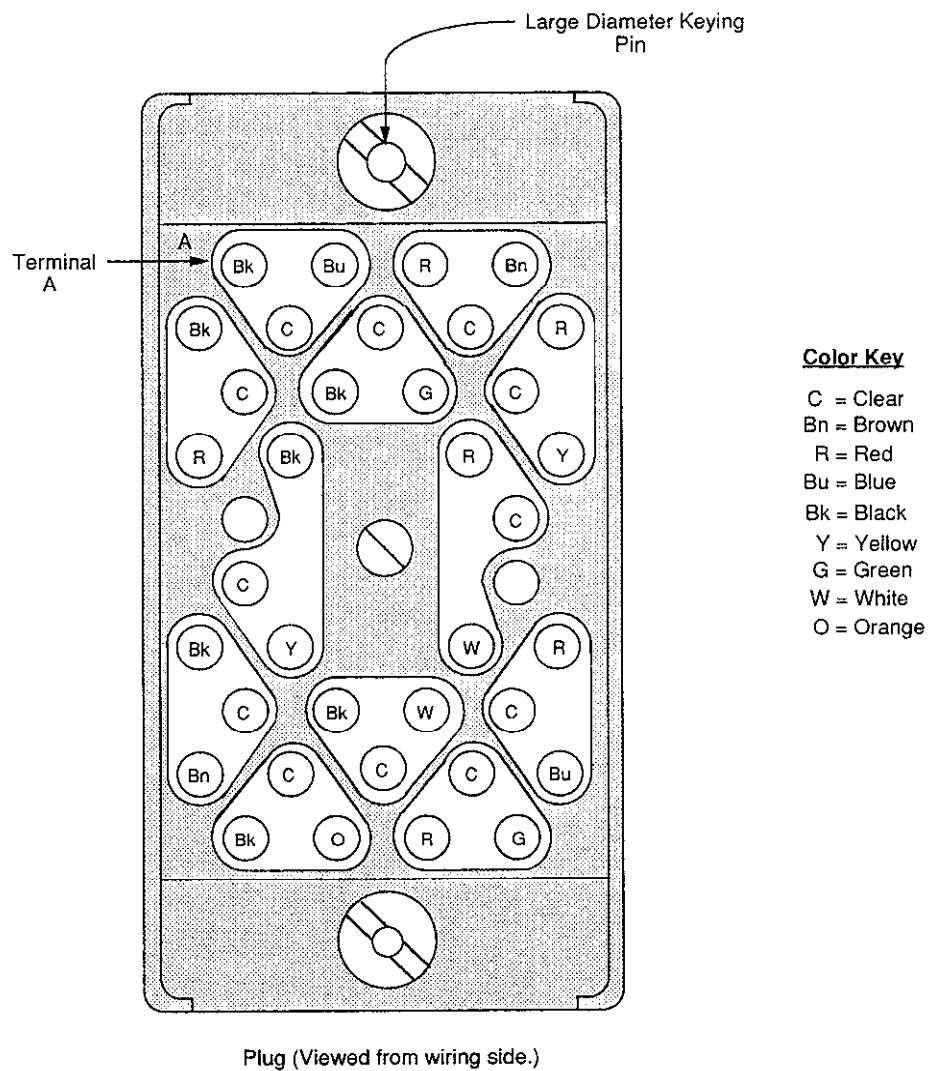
38-Pin Plug (7078-KIT) Wire Color Coding
